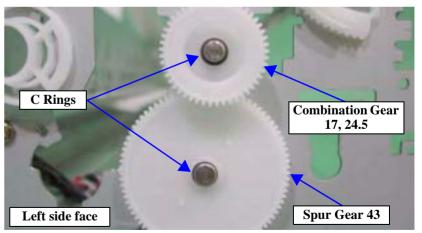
Removing the Combination Gear 17, 24.5 and Spur Gear 43
